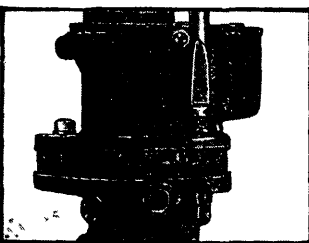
Set body in place, then tighten screws securely. Don't forget lock washers
